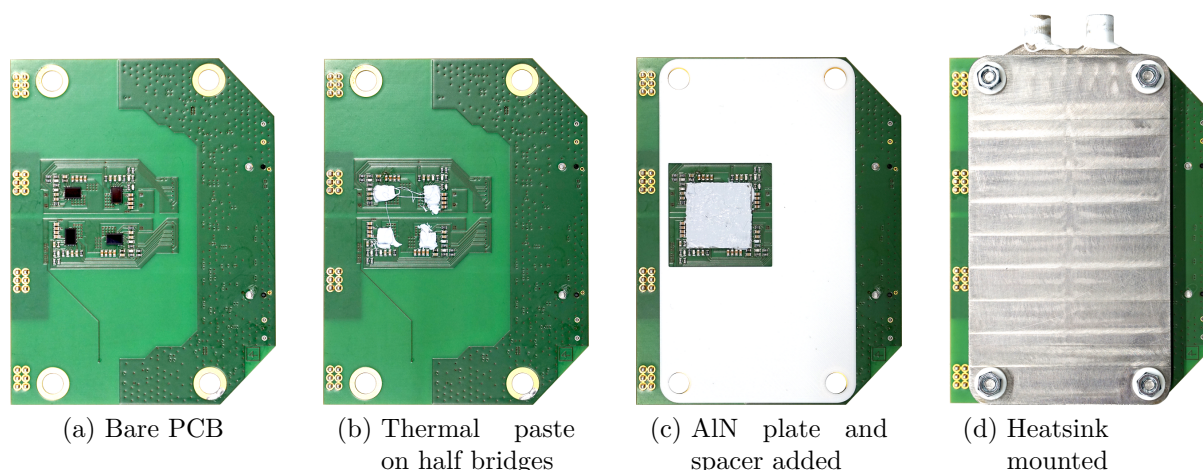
Assembly of the cooling system on the bottom side of the converter PCB
